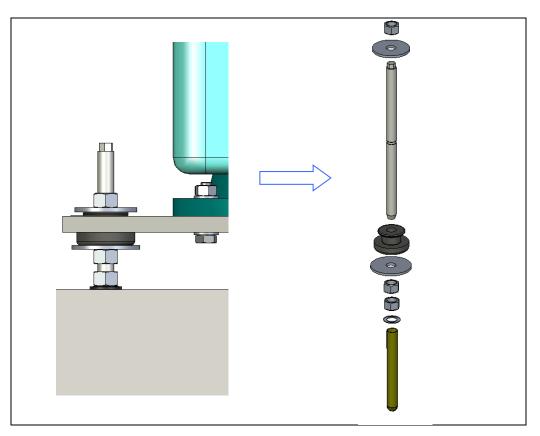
Fastening set for (stainless steel) mounting plate/bridge, for use on stainless steel bridge
